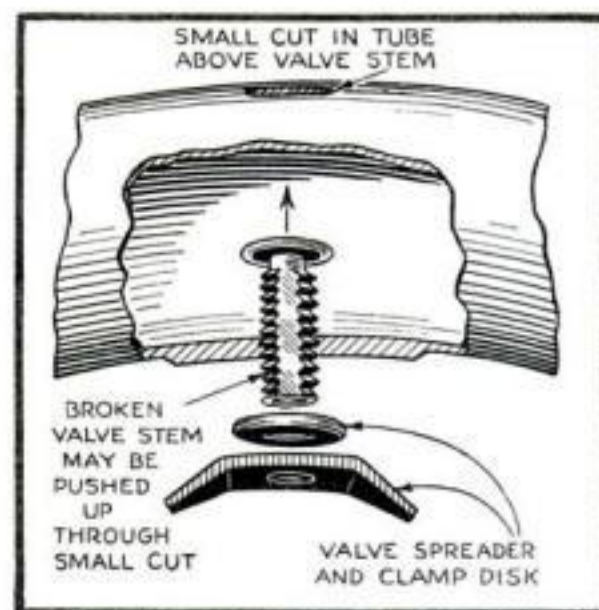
To put in a new tire tube valve stem, cut a slit in tube and insert stem through it
